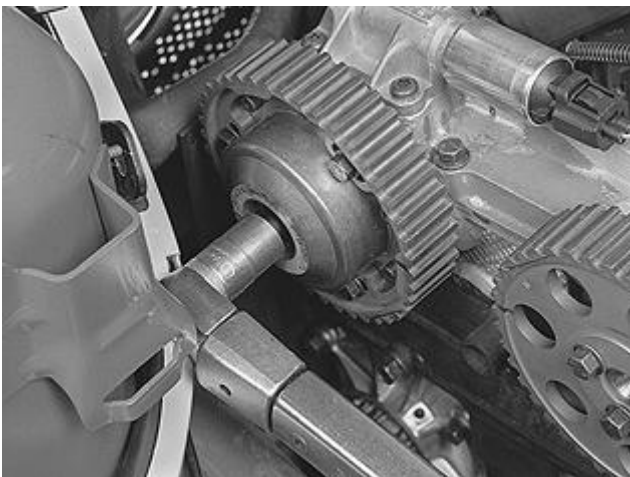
Identifying Timing Gear Pulley, Center Screw And Plug
